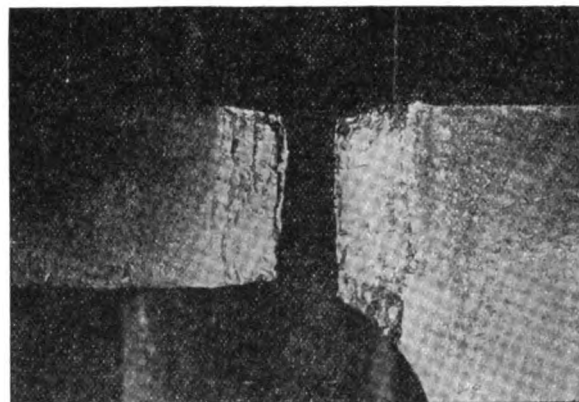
BEFORE. Broken Engine Frame with break cut out, prepared for welding.
